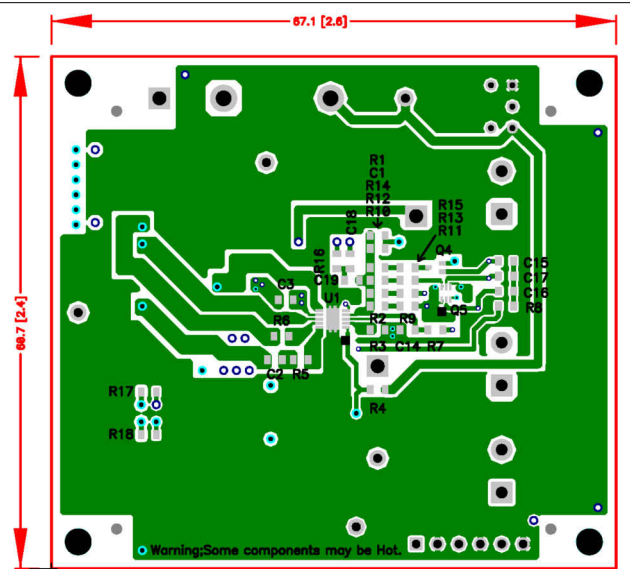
Bottom Assembly Drawing (Bottom View)
